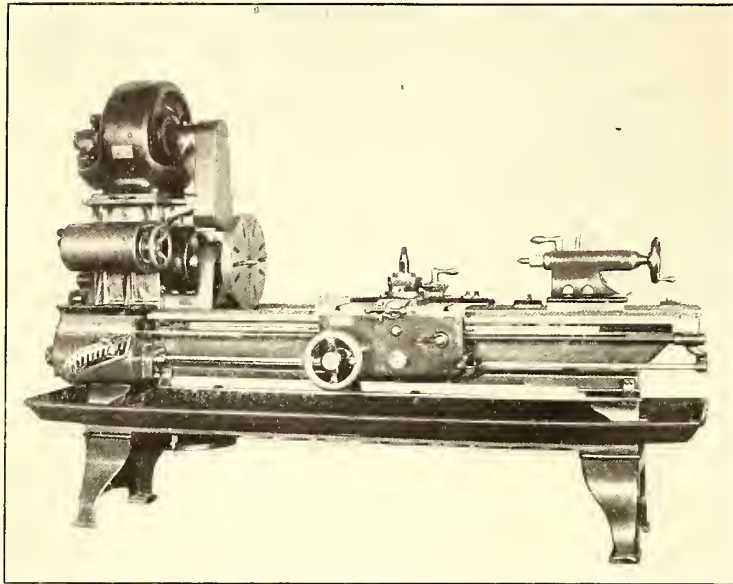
INTER-POLE MOTOR DRIVING 16-IN. HENDEY LATHE, THROUGH SILENT CHAIN. ANY DESIRED SPEED CAN BE QUICKLY OBTAINED
